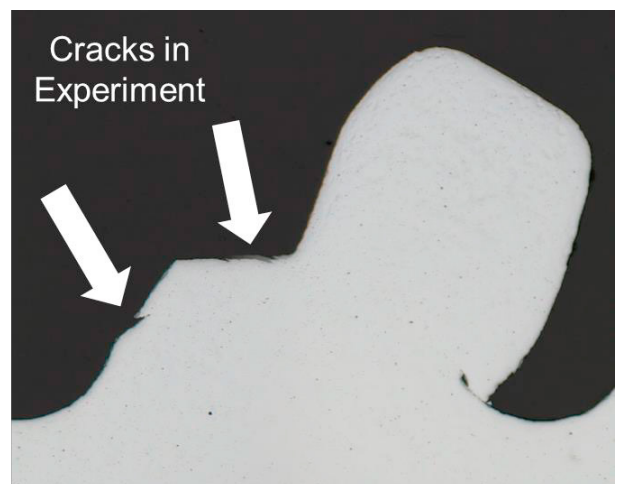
Cracks observed in experiment for gear wheel tested at 0.08 mm/s
